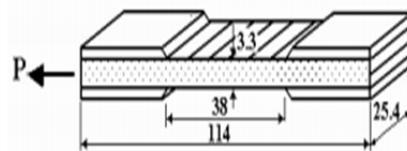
Dimension for 90° (transverse) unidirectional ASTM D3039.
